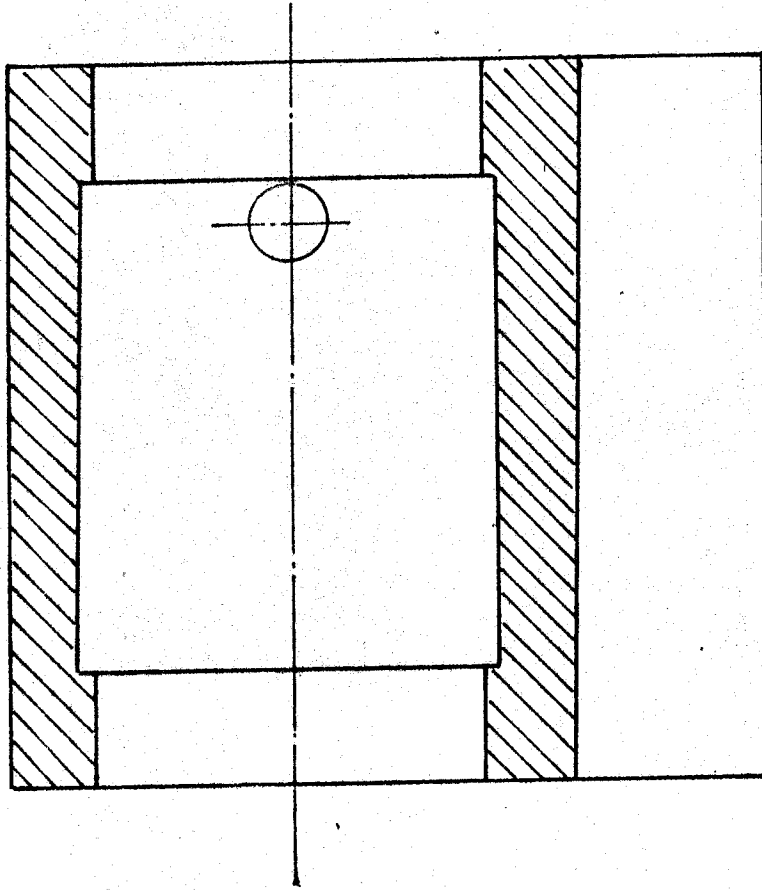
Fixture for the Sleeve of Aluminum Stationary Tube.
